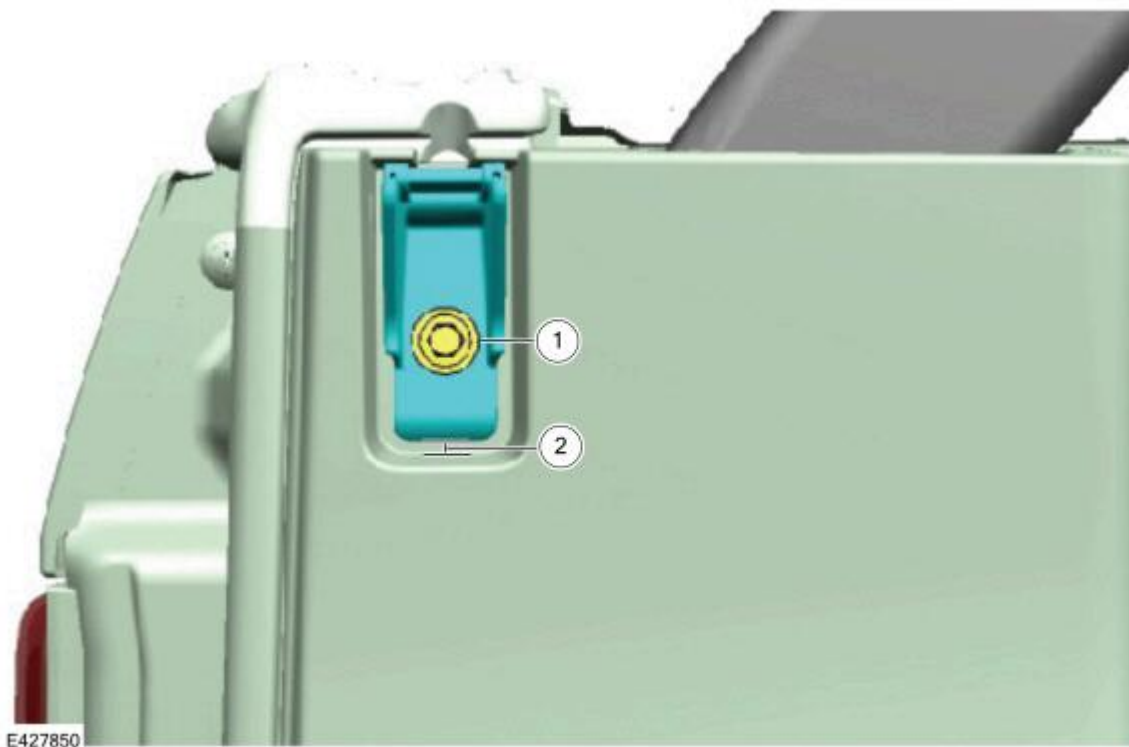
Showing the location of the tension bow latch receivers. Rear door has been removed for demonstration purposes only.
